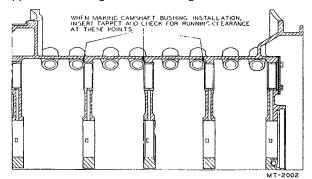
Illustration of Camshaft Bearings in Crankcase
